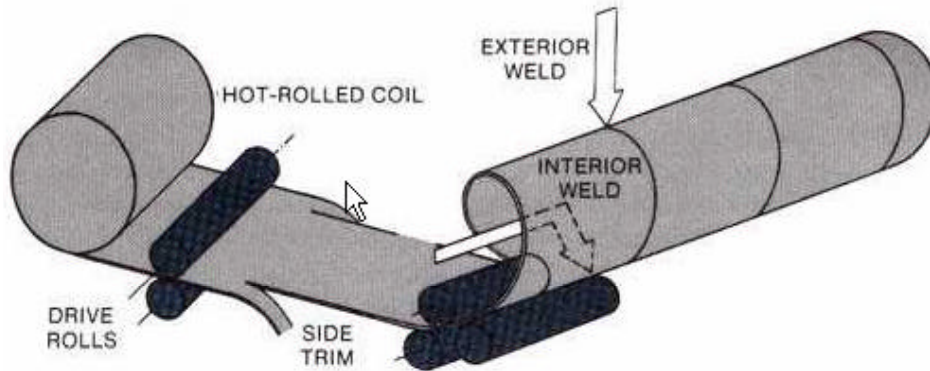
Manufacturing Process of Spiral Weld Pipe
